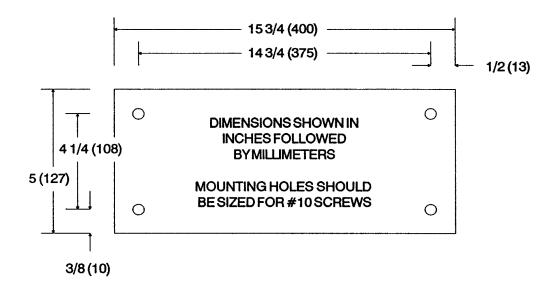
PLS-850 Assembly, Mounting Requirements
